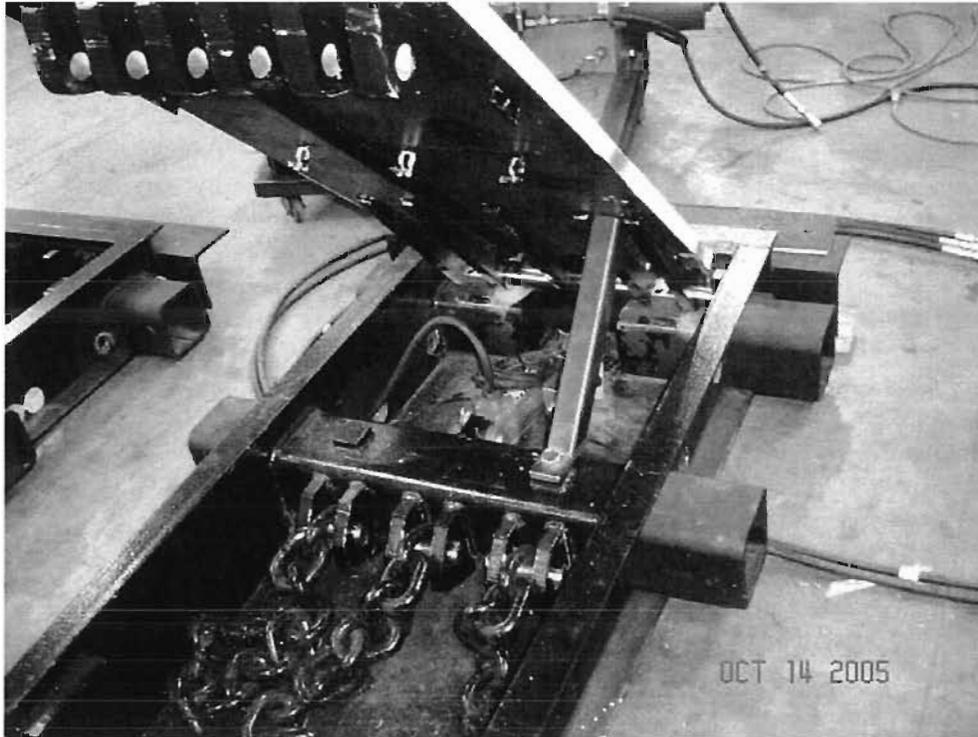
Safety brace in place and the chain pin removed. The chains are laying on the floor of the Barrier frame assembly.
